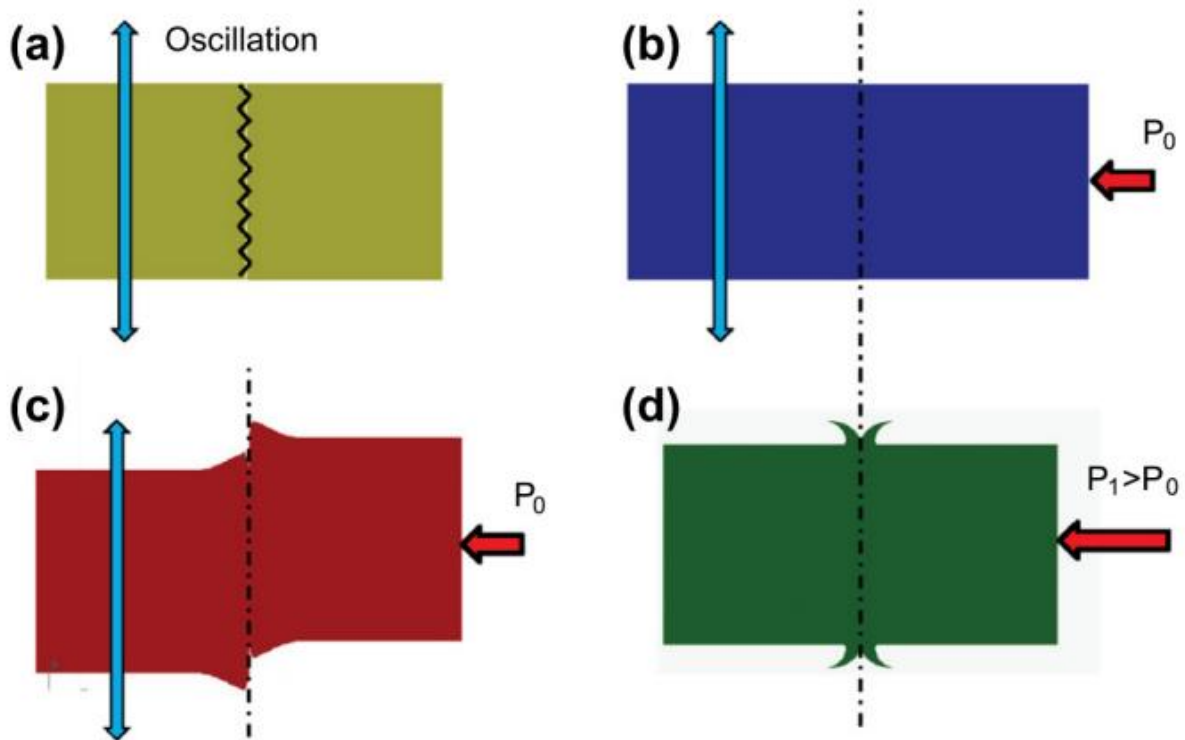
2D Linear friction welding diagram, showing the four stages of the linear welding process. [49]
